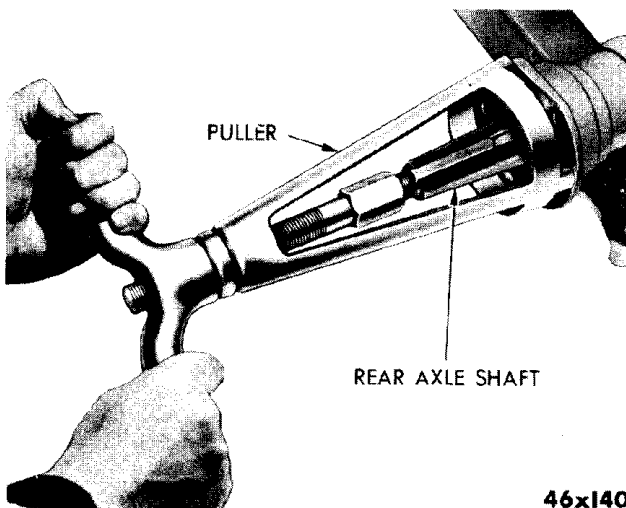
Removing Axle Drive Shaft and Bearing—Tool C-499-A
